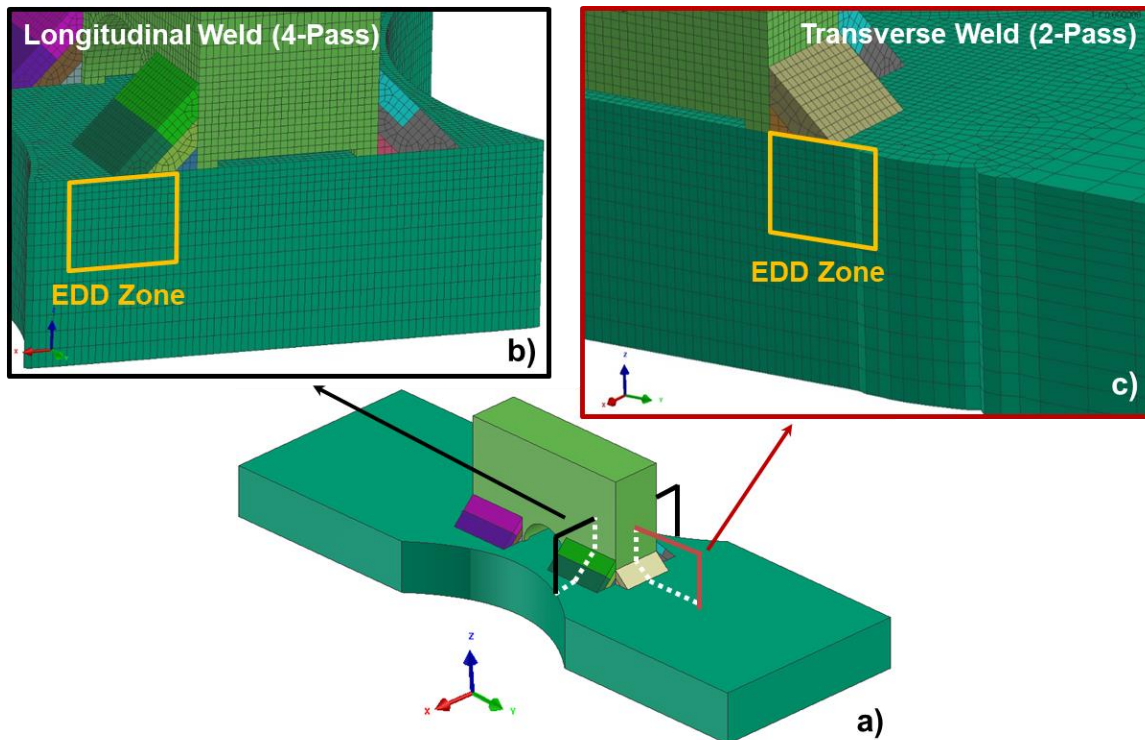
Image of the a) CAD model showing the locations of the EDD measurement zones below the b) longitudinal and c) transverse weld joints.
